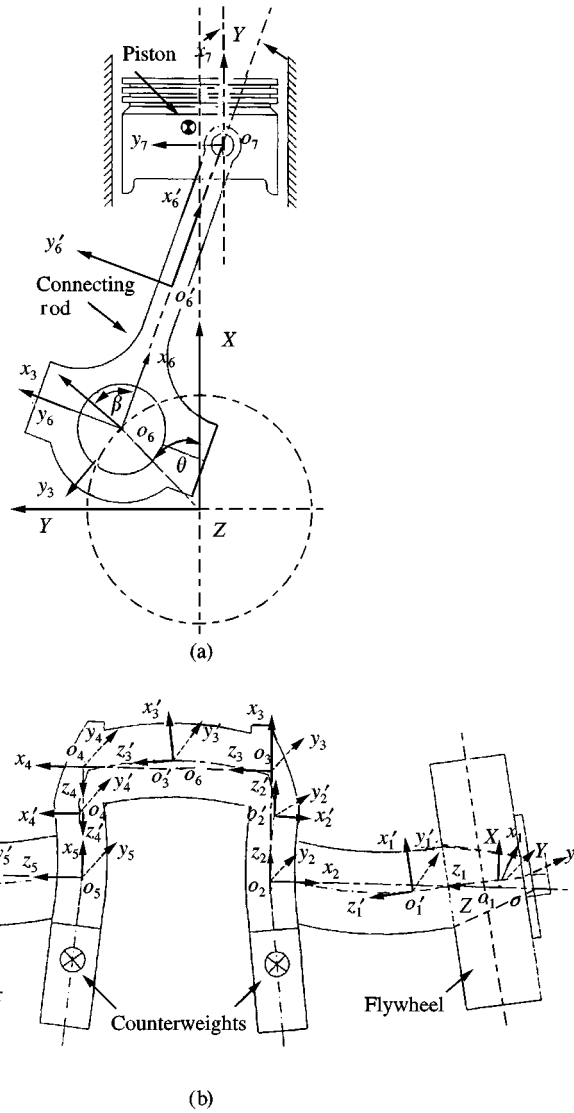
A schematic of the crank-slider mechanism: (a) connecting rod-piston, (b) crankshaft.
